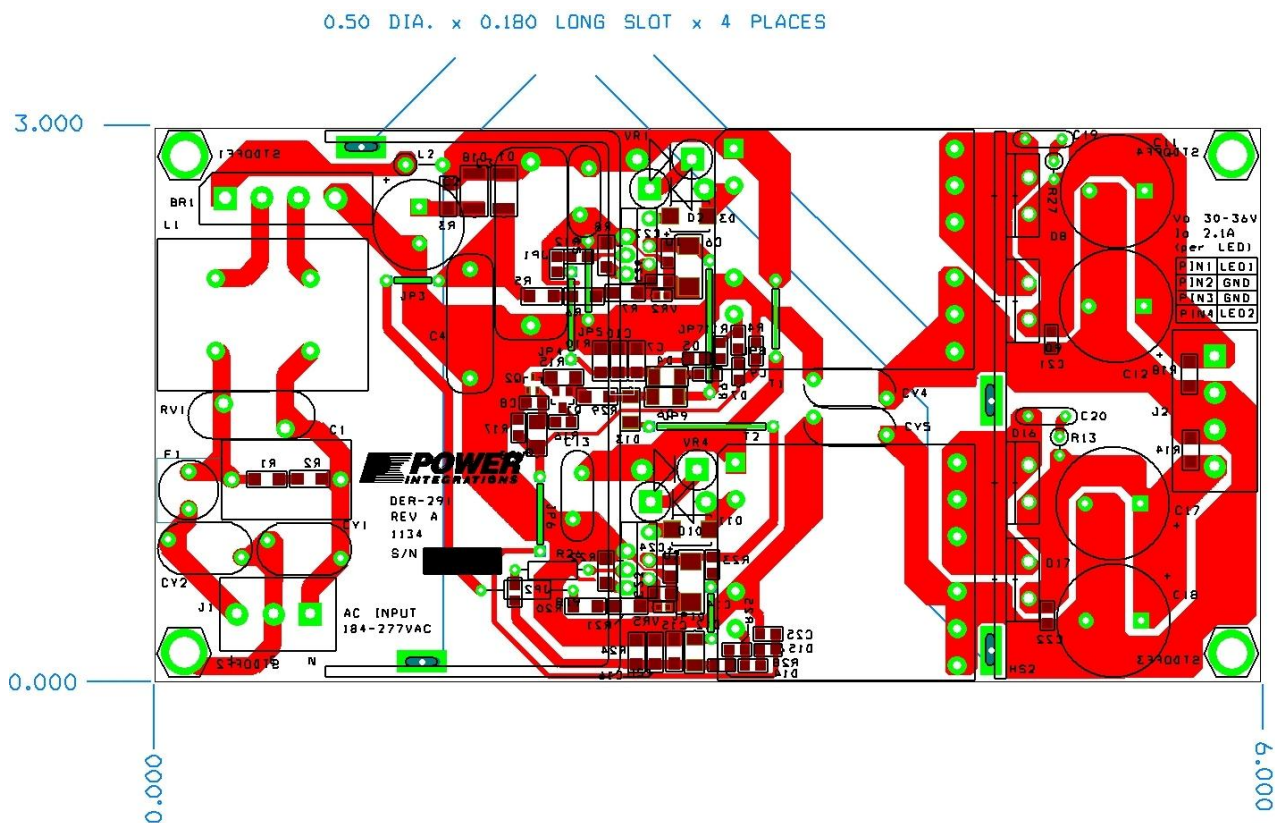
Printed Circuit Layout, Top and Bottom (3" x 6").
